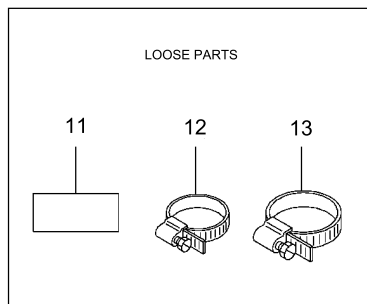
ENGINE, CYLINDER HEAD
